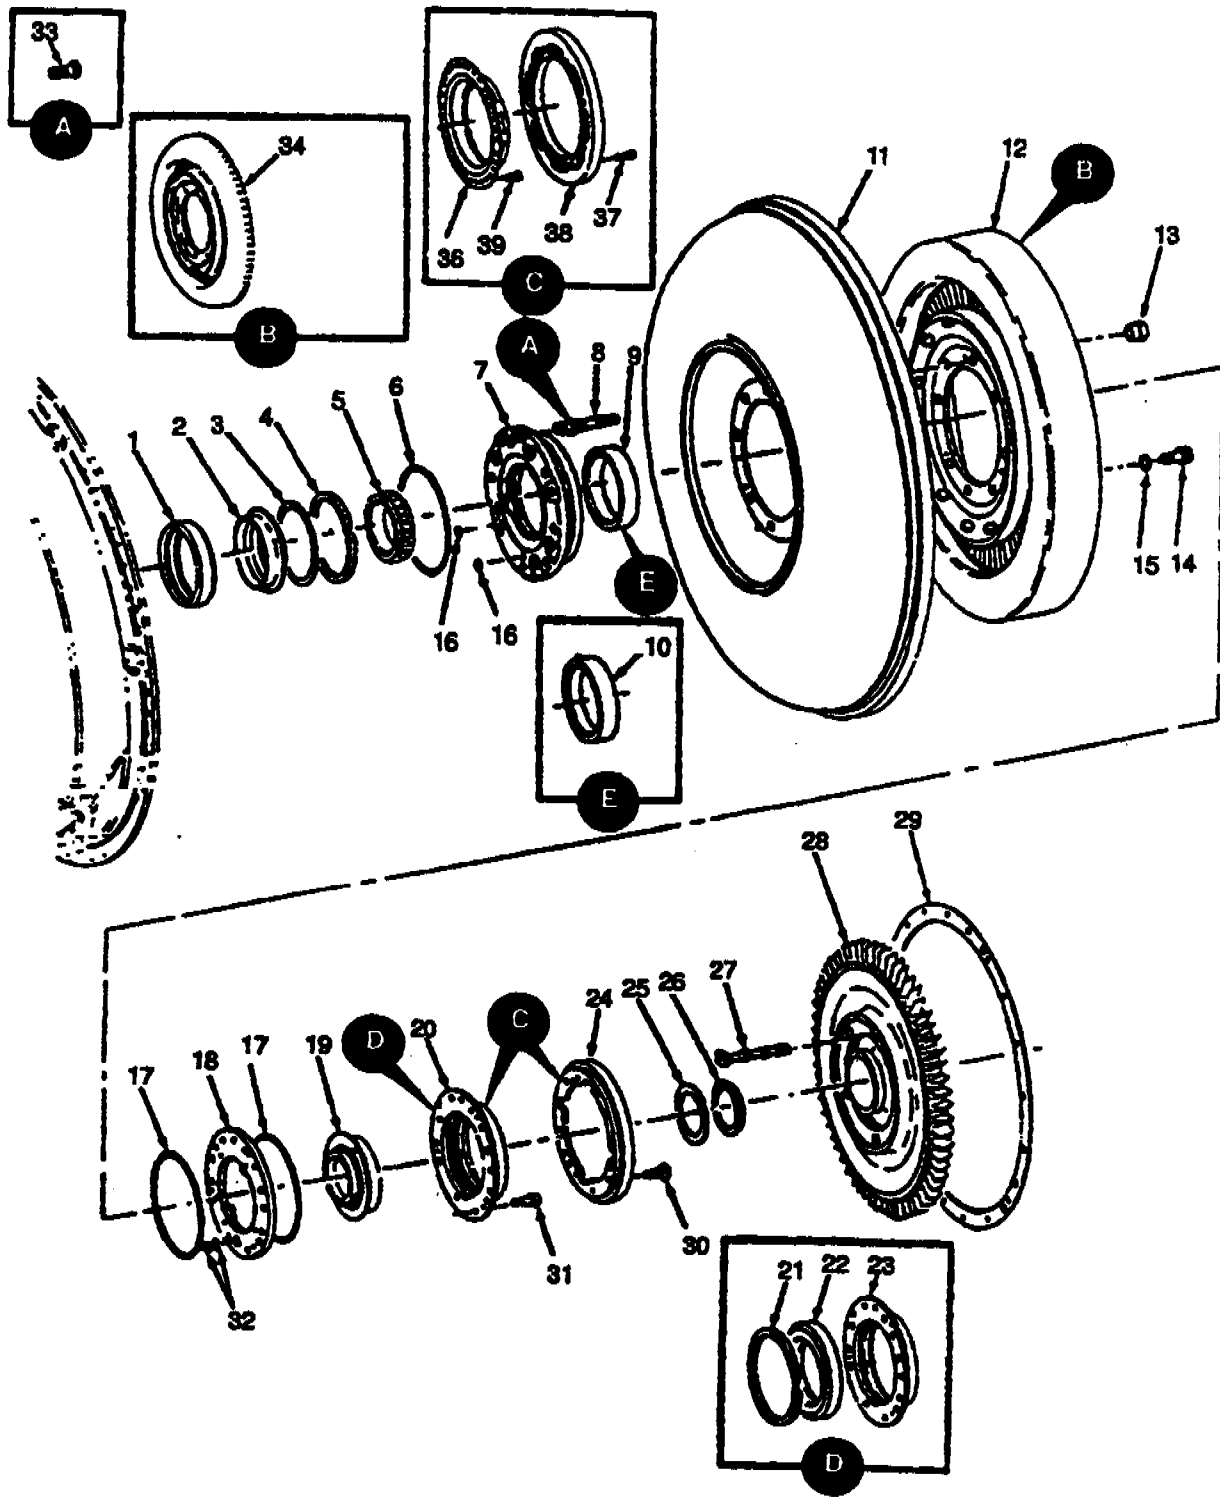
Gas Producer Rotor, Nozzle, and Combustion Chamber Deflector Assemblies and Attaching Parts (Sheet 1 of 2).
